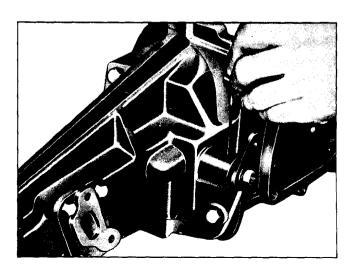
D-17 Removing Reverse Shifter Shaft Lock Pin
